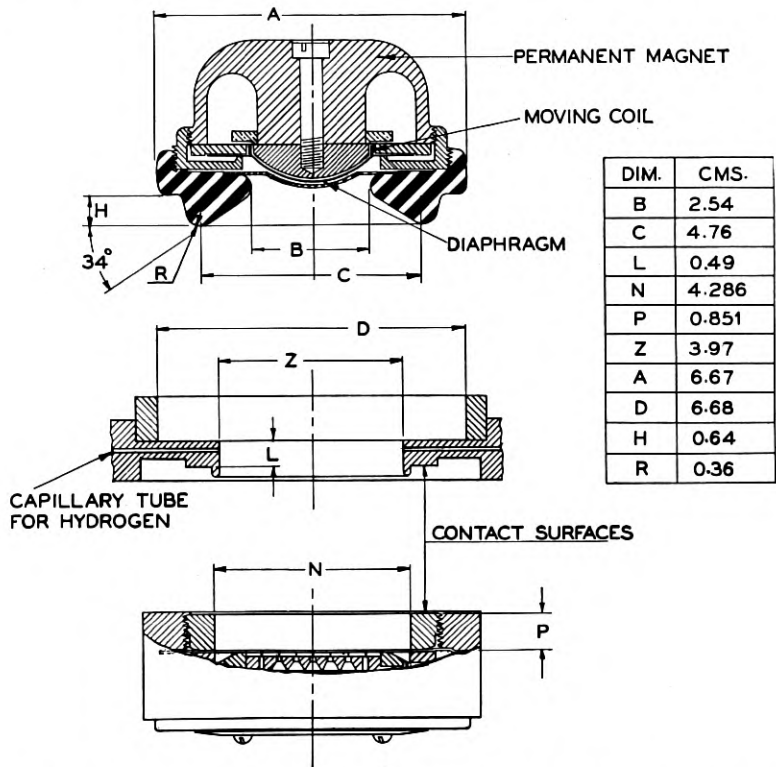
Schematic of moving coil receiver, coupler and condenser transmitter.
